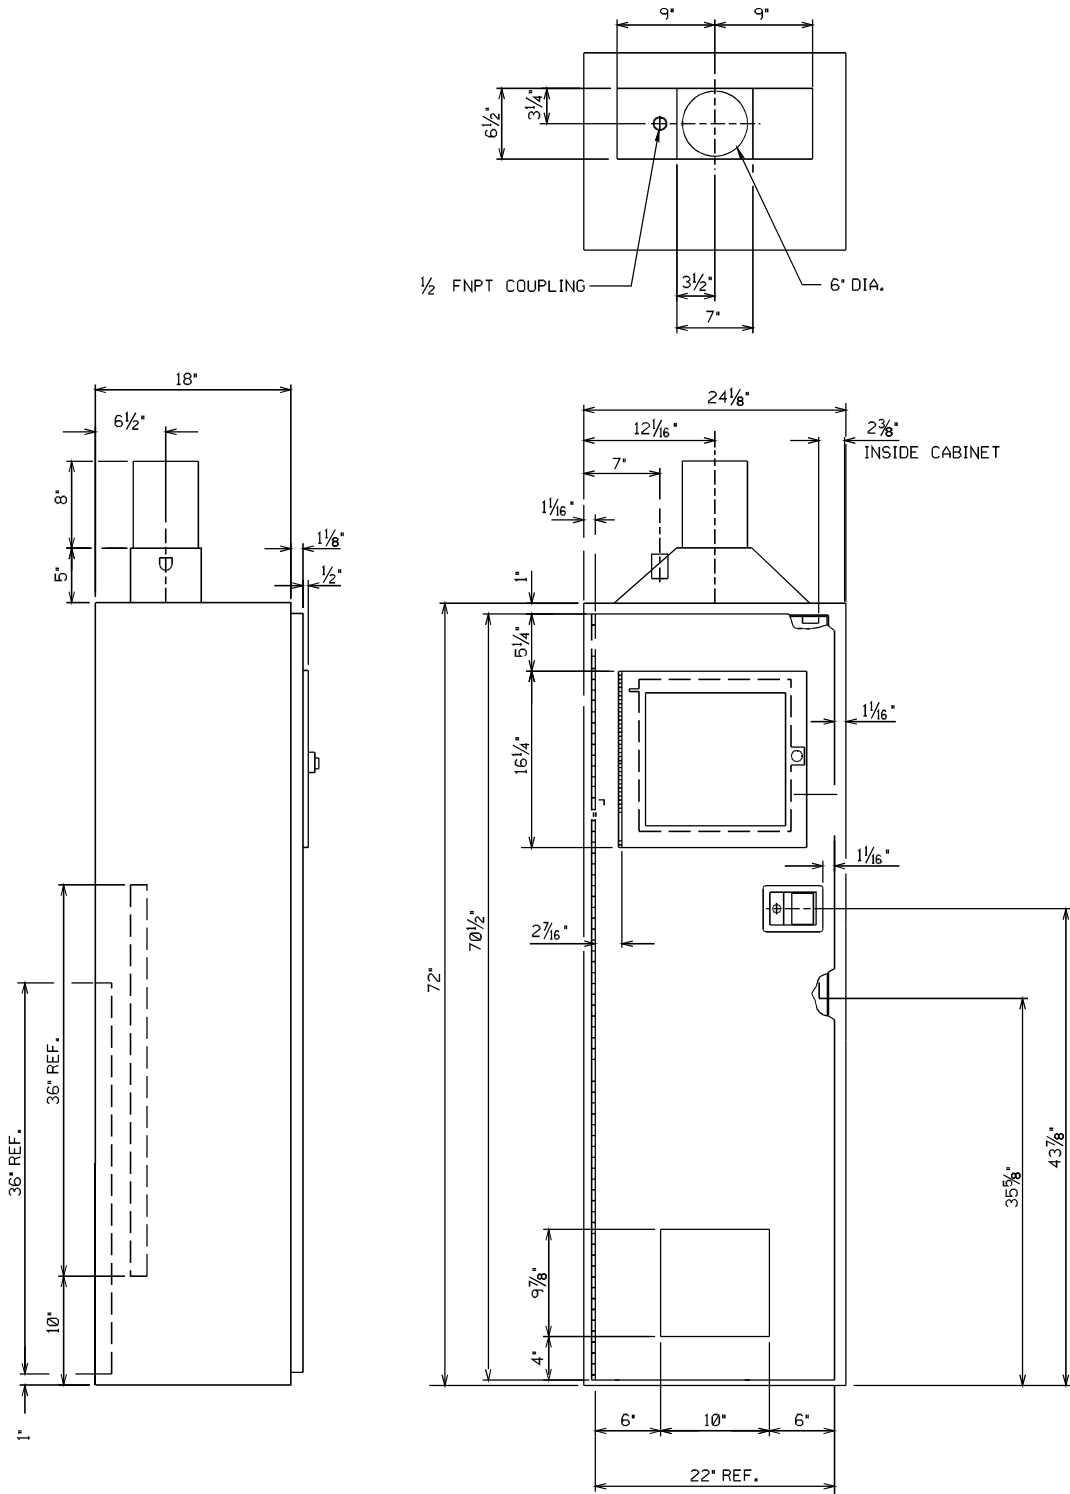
Outline Dimensions for 2 Cylinder Cabinet
